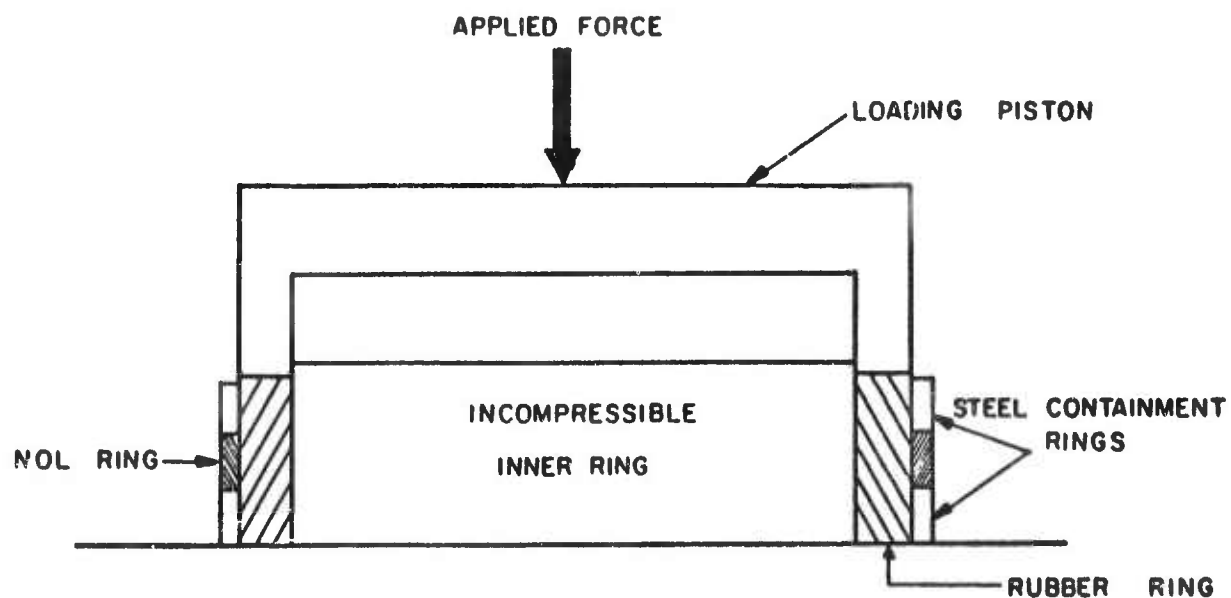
A Mechanical Fixture for a Uniform Tensile Loading of Standard NOL Rings.
